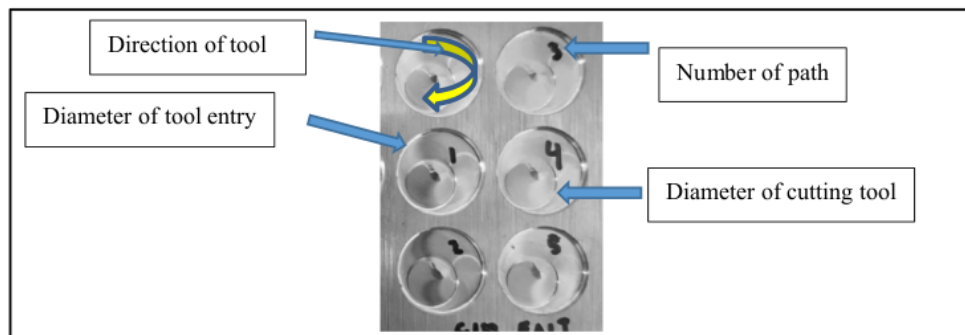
Circular ramping with cutting parameter is V_c 90m/min and F_z 0.1mm/tooth.
